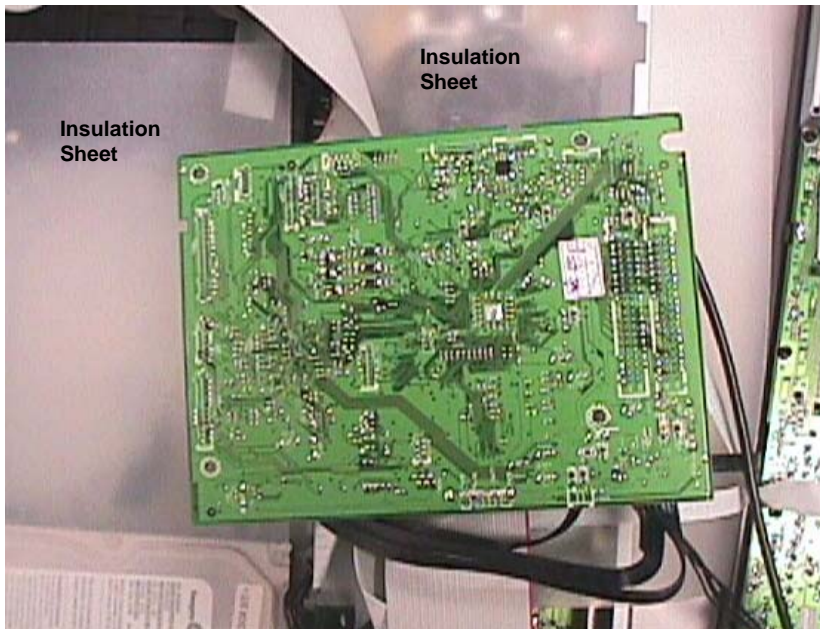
Digital Board Service Position (the Digital Board Bracket Removed, and Front Panel Detached)
